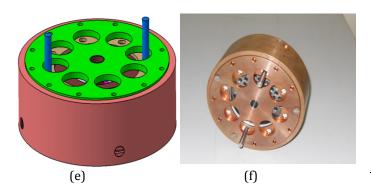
(e) Tungsten Hot plate Ionizer; (f) Actual fabricated Tungsten Hot plate Ionizer
